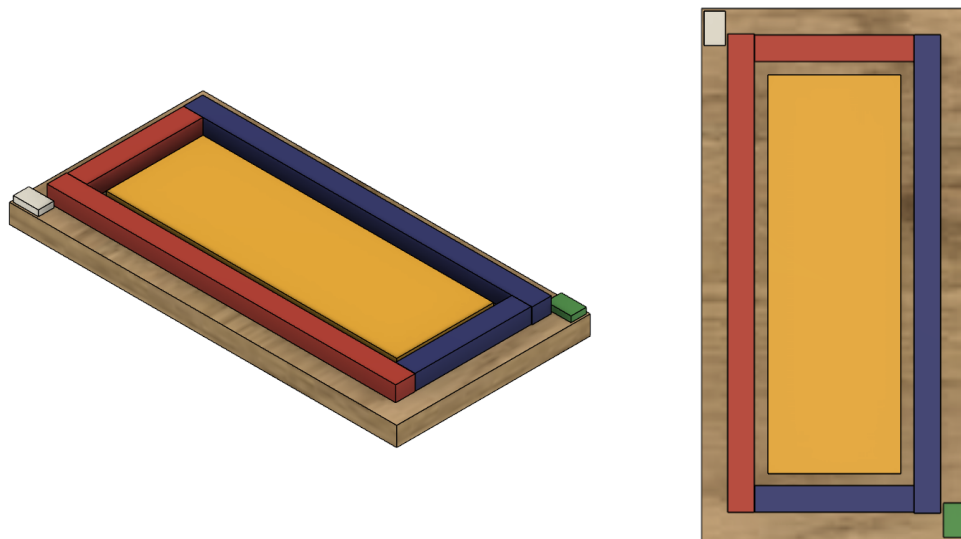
Isometric and top 3D view of our final setup. Image provided by the Lazer Pong team.
